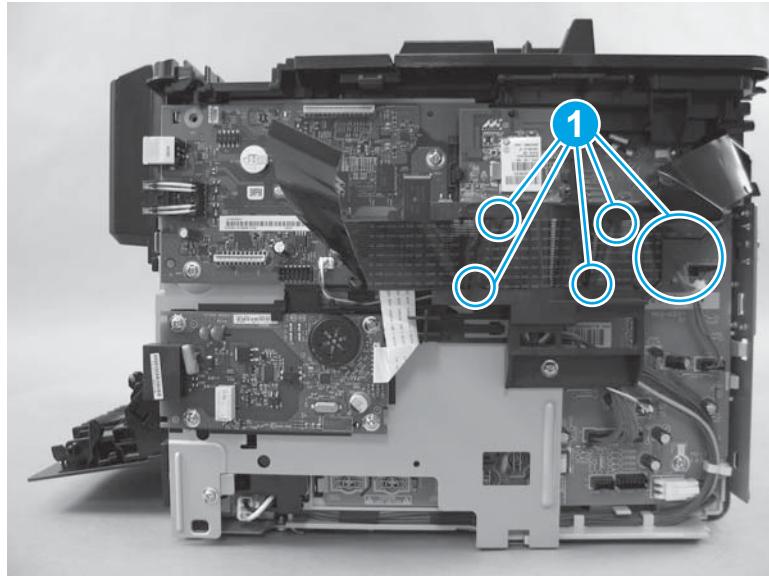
Remove the wireless PCA for the M177 model (1 of 3)
